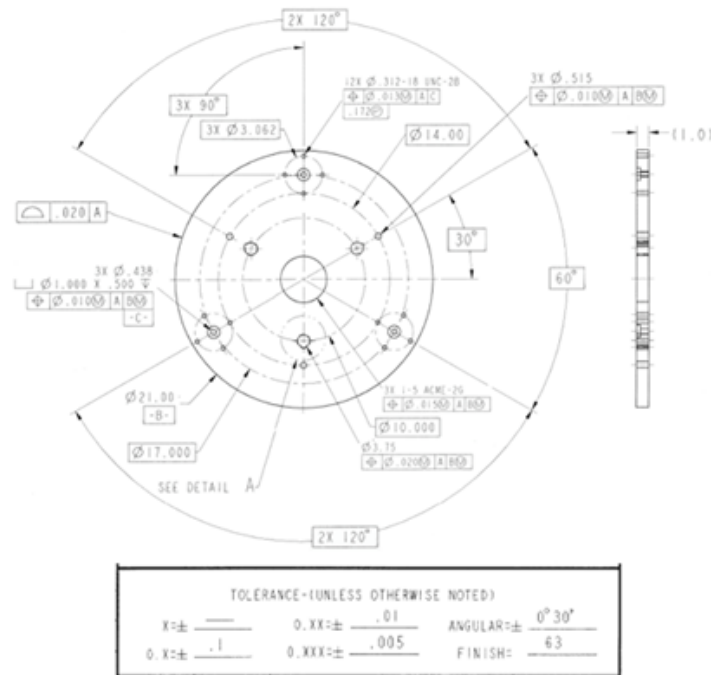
Engineering Drawing (128Y-270958-D2) of the Platen (Dimensions in Inches).
